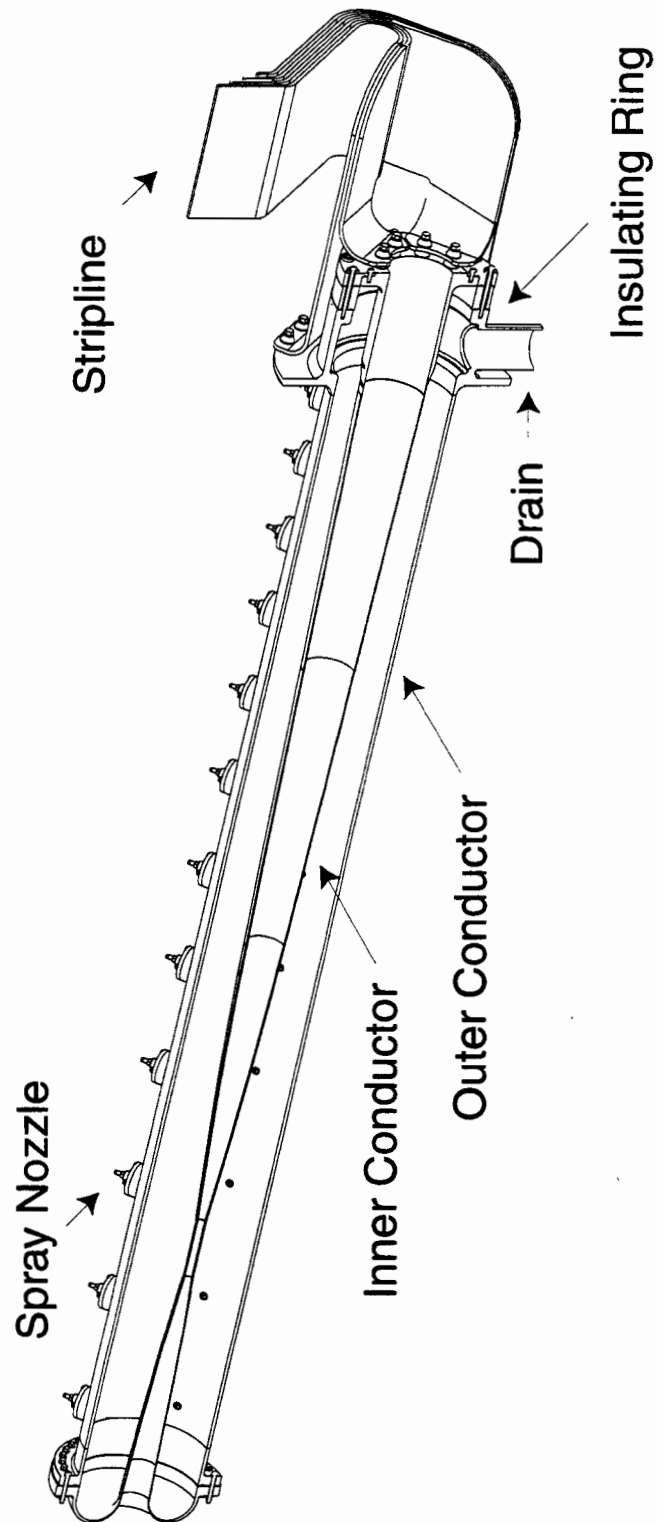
Cutaway drawing of the first horn. The strip-line connections and the water drain are also shown.
